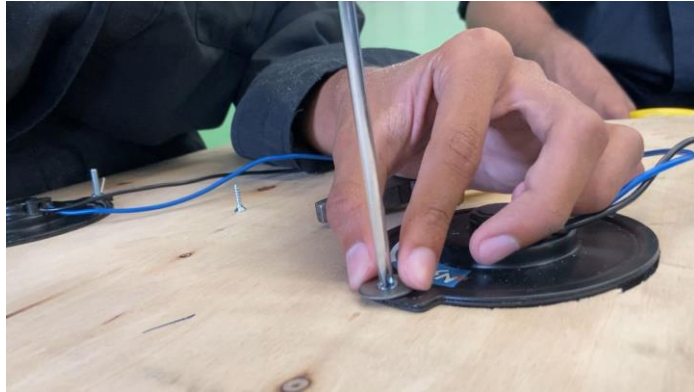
Insert the motor into the hole that has been specially made for the motor and tighten it tightly using screws so that it does not fall.
